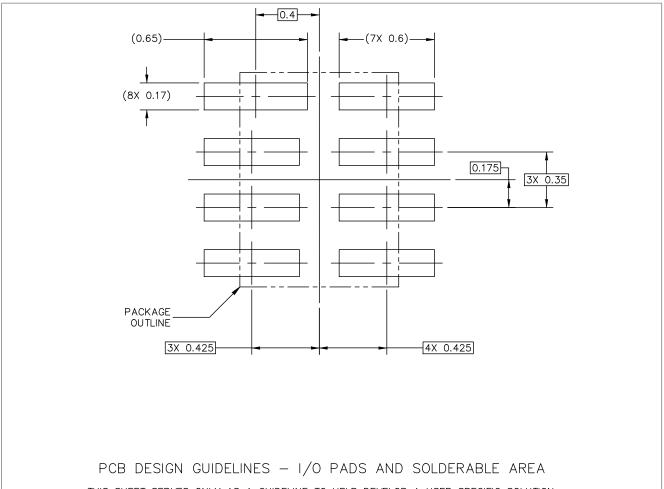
PCB footprint for SOT1052-2 (XSON8); notes
